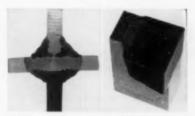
Aluminum is frequently joined to copper or steel in electrical bus systems. Left, copper is braze-welded to aluminum in a double Tee joint. Right, aluminum and steel are braze-welded. In neither case is the copper or steel melted during joining.
